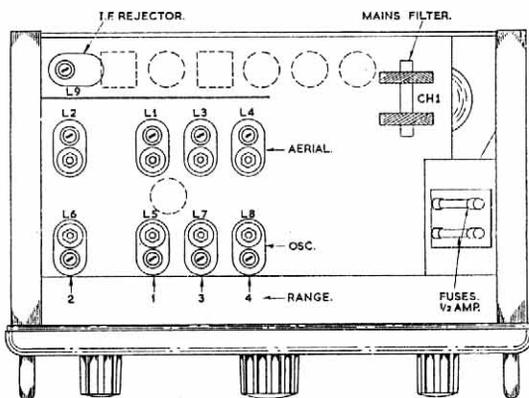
Location of trimmers and other parts on the underside of the "870" receiver.
